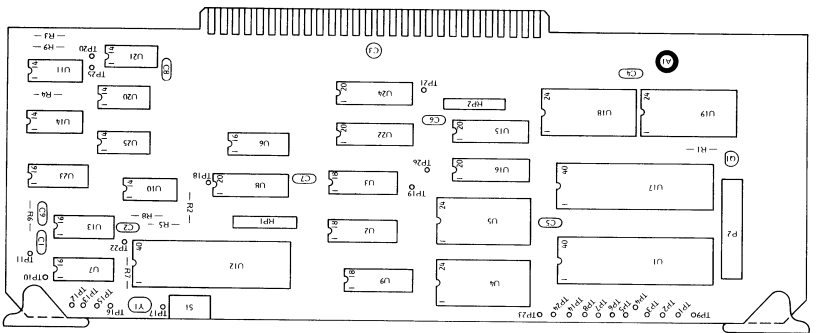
A1 GPIB Interface PCB Schematic (Sheet 1 of 3)
